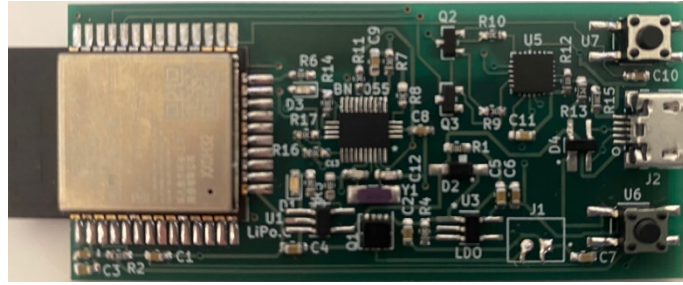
Version 1 Printed and Assembled Circuit Board
